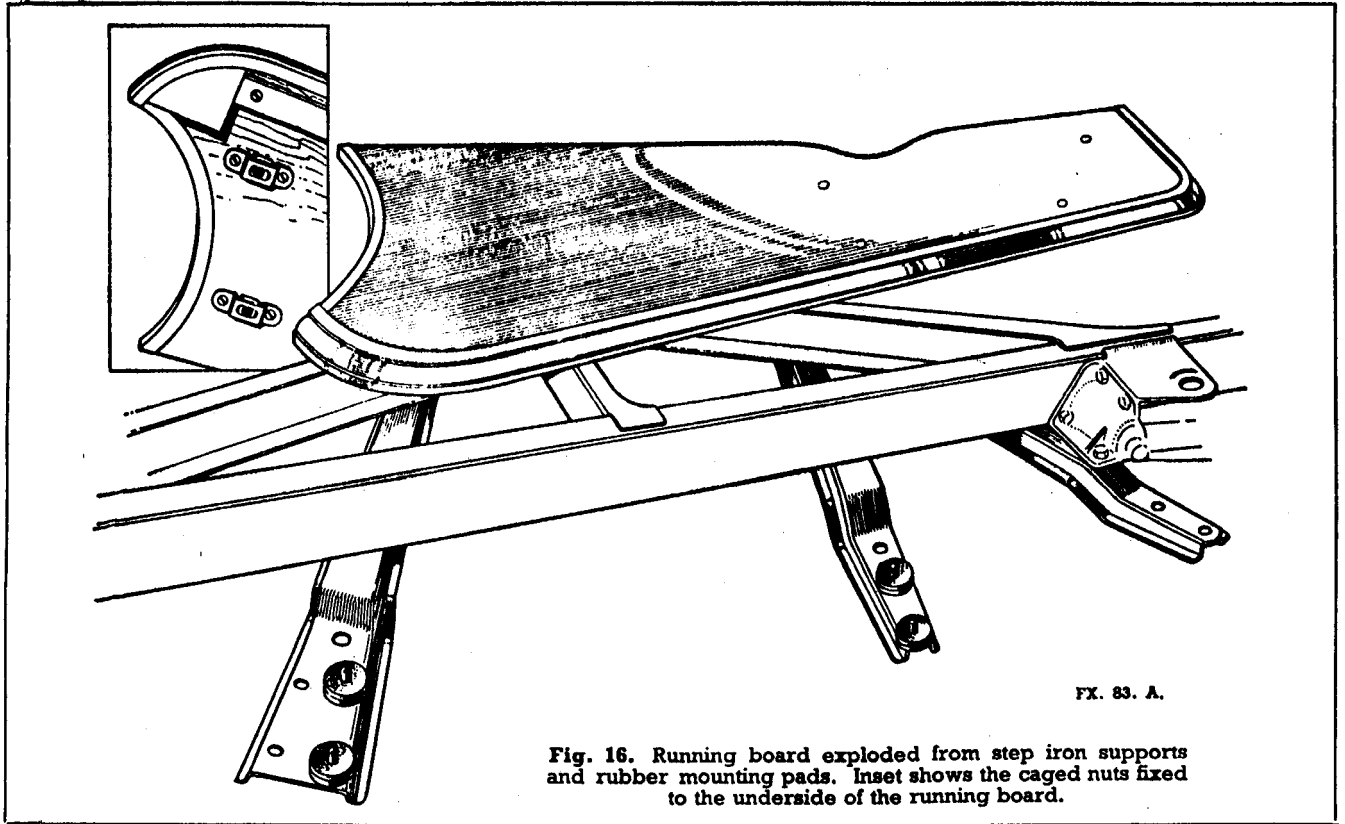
Running board exploded from step iron supports and rubber mounting pads. Inset shows the caged nuts fixed to the underside of the running board.
